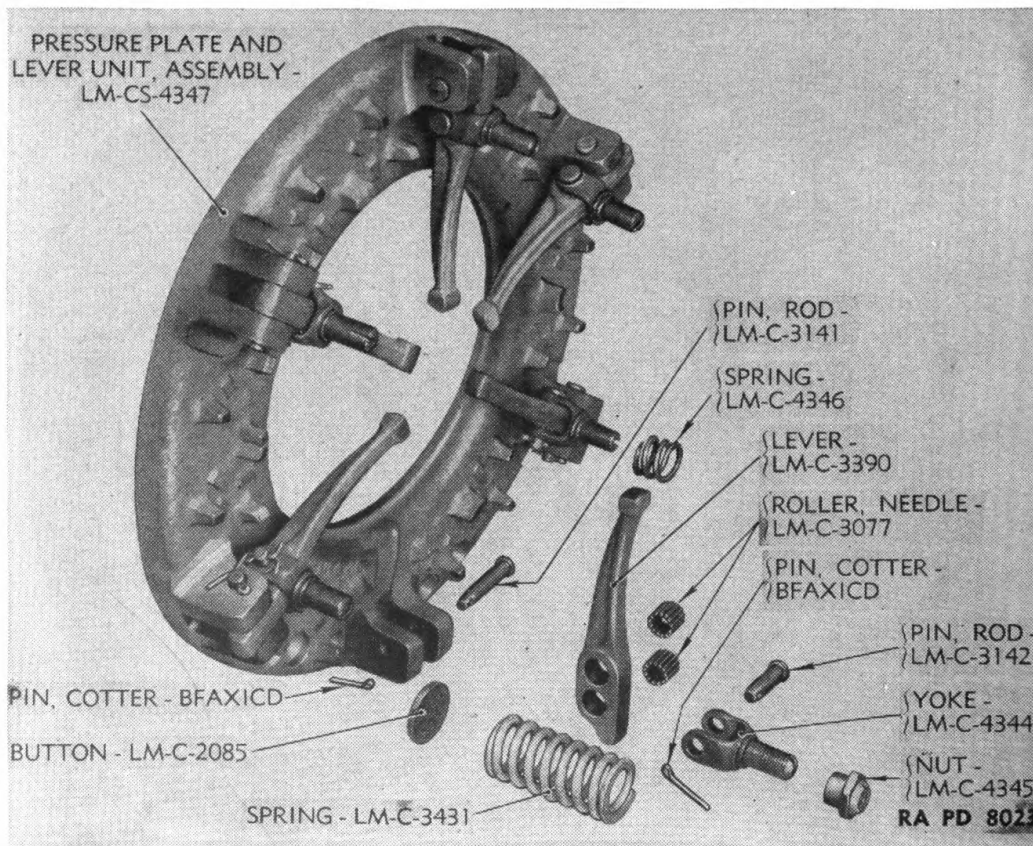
Clutch pressure plate and lever unit assembly, exploded view.
